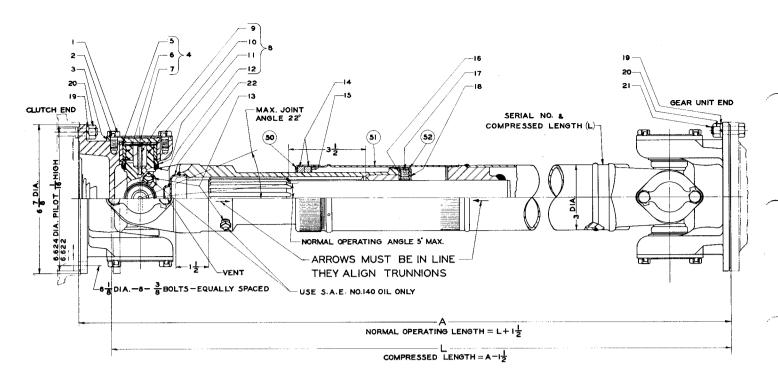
7983-SF PROPELLER SHAFT (Standard—Tubular Type)
